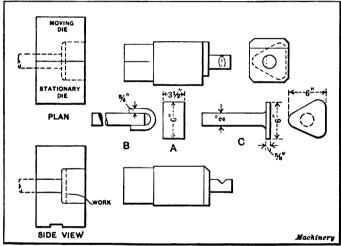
Forging Machine Dies and Tools for making a Car Float Stanchion Foot
